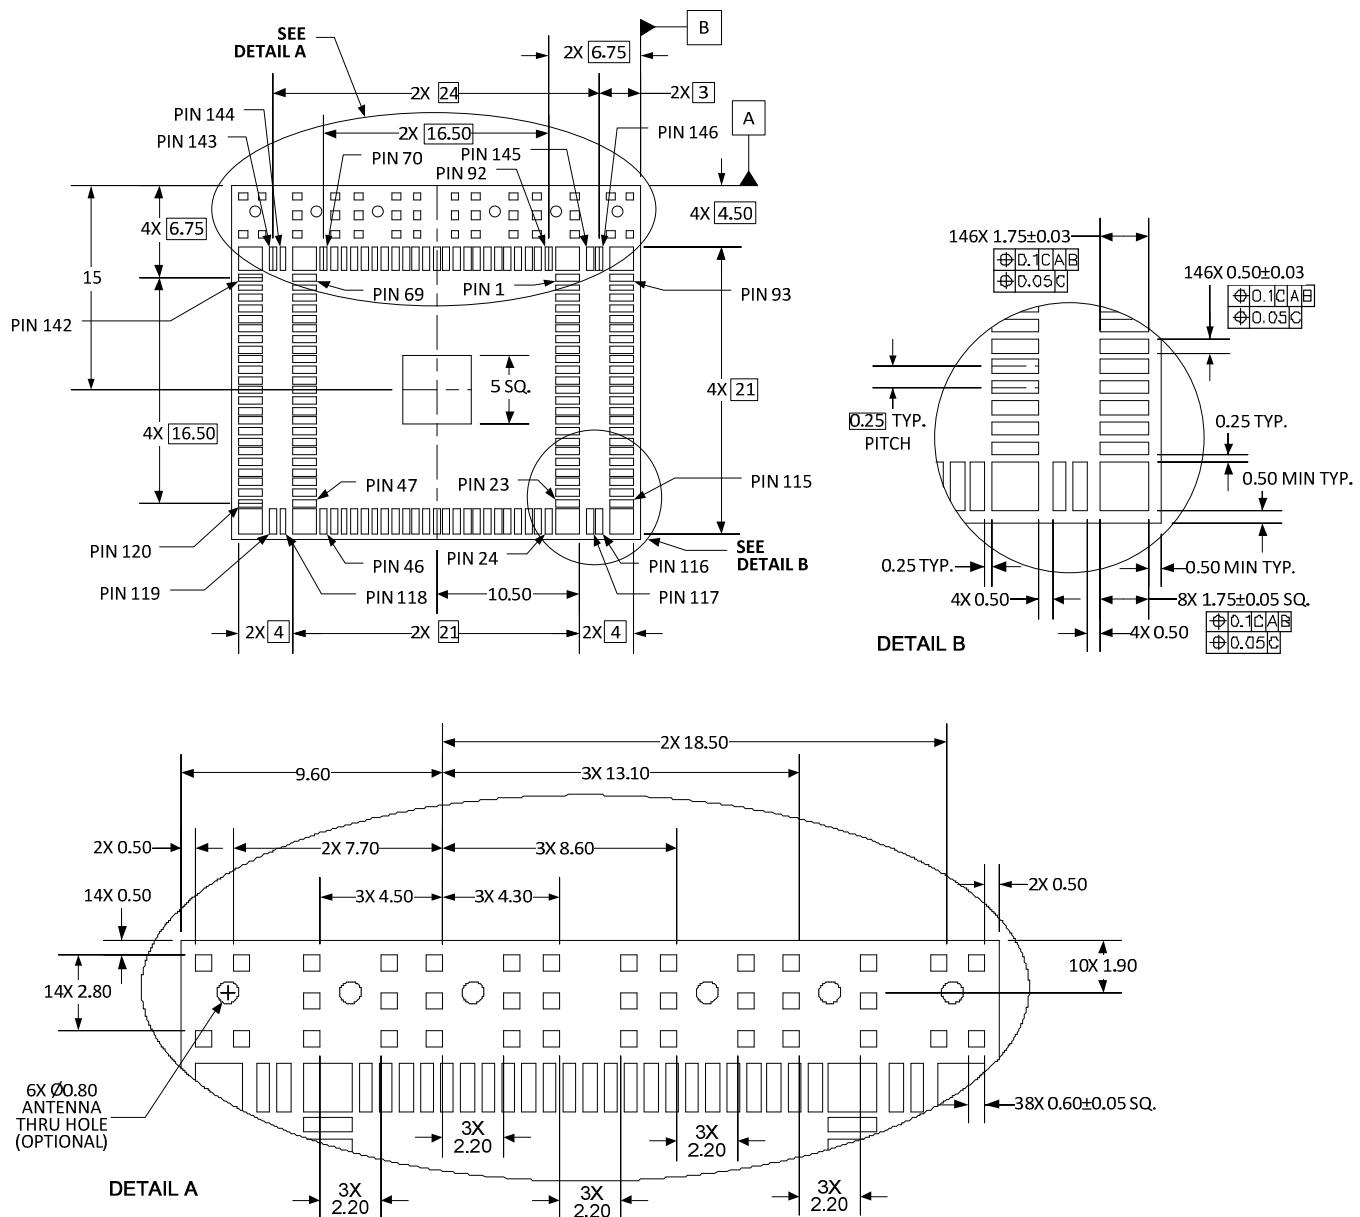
M.2 Type 3026-S3 Mechanical Outline Drawing Details
